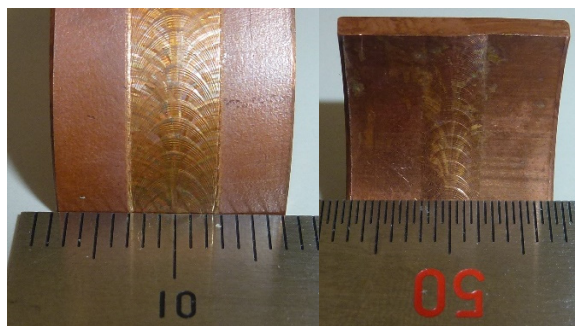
Enlarged picture of the front (left) and back (right) side of the Ag-OFC tube welding bead.
